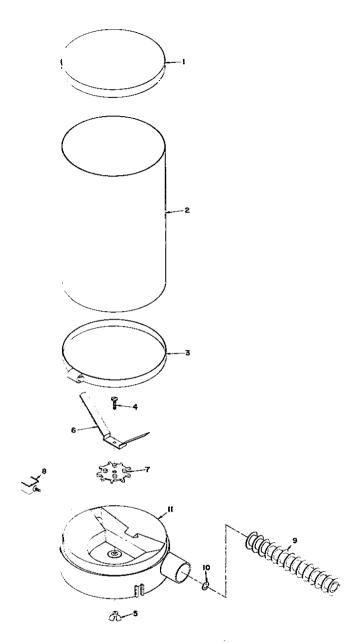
TEA CANISTER ASSEMBLY COMPLETE
